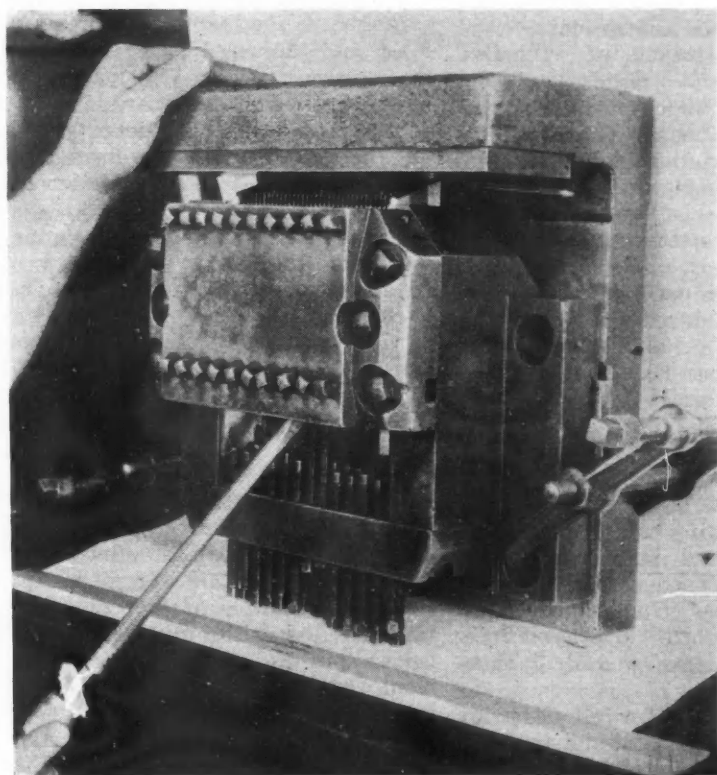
Set of P & J finning tools being adjusted in tool holder after reconditioning
